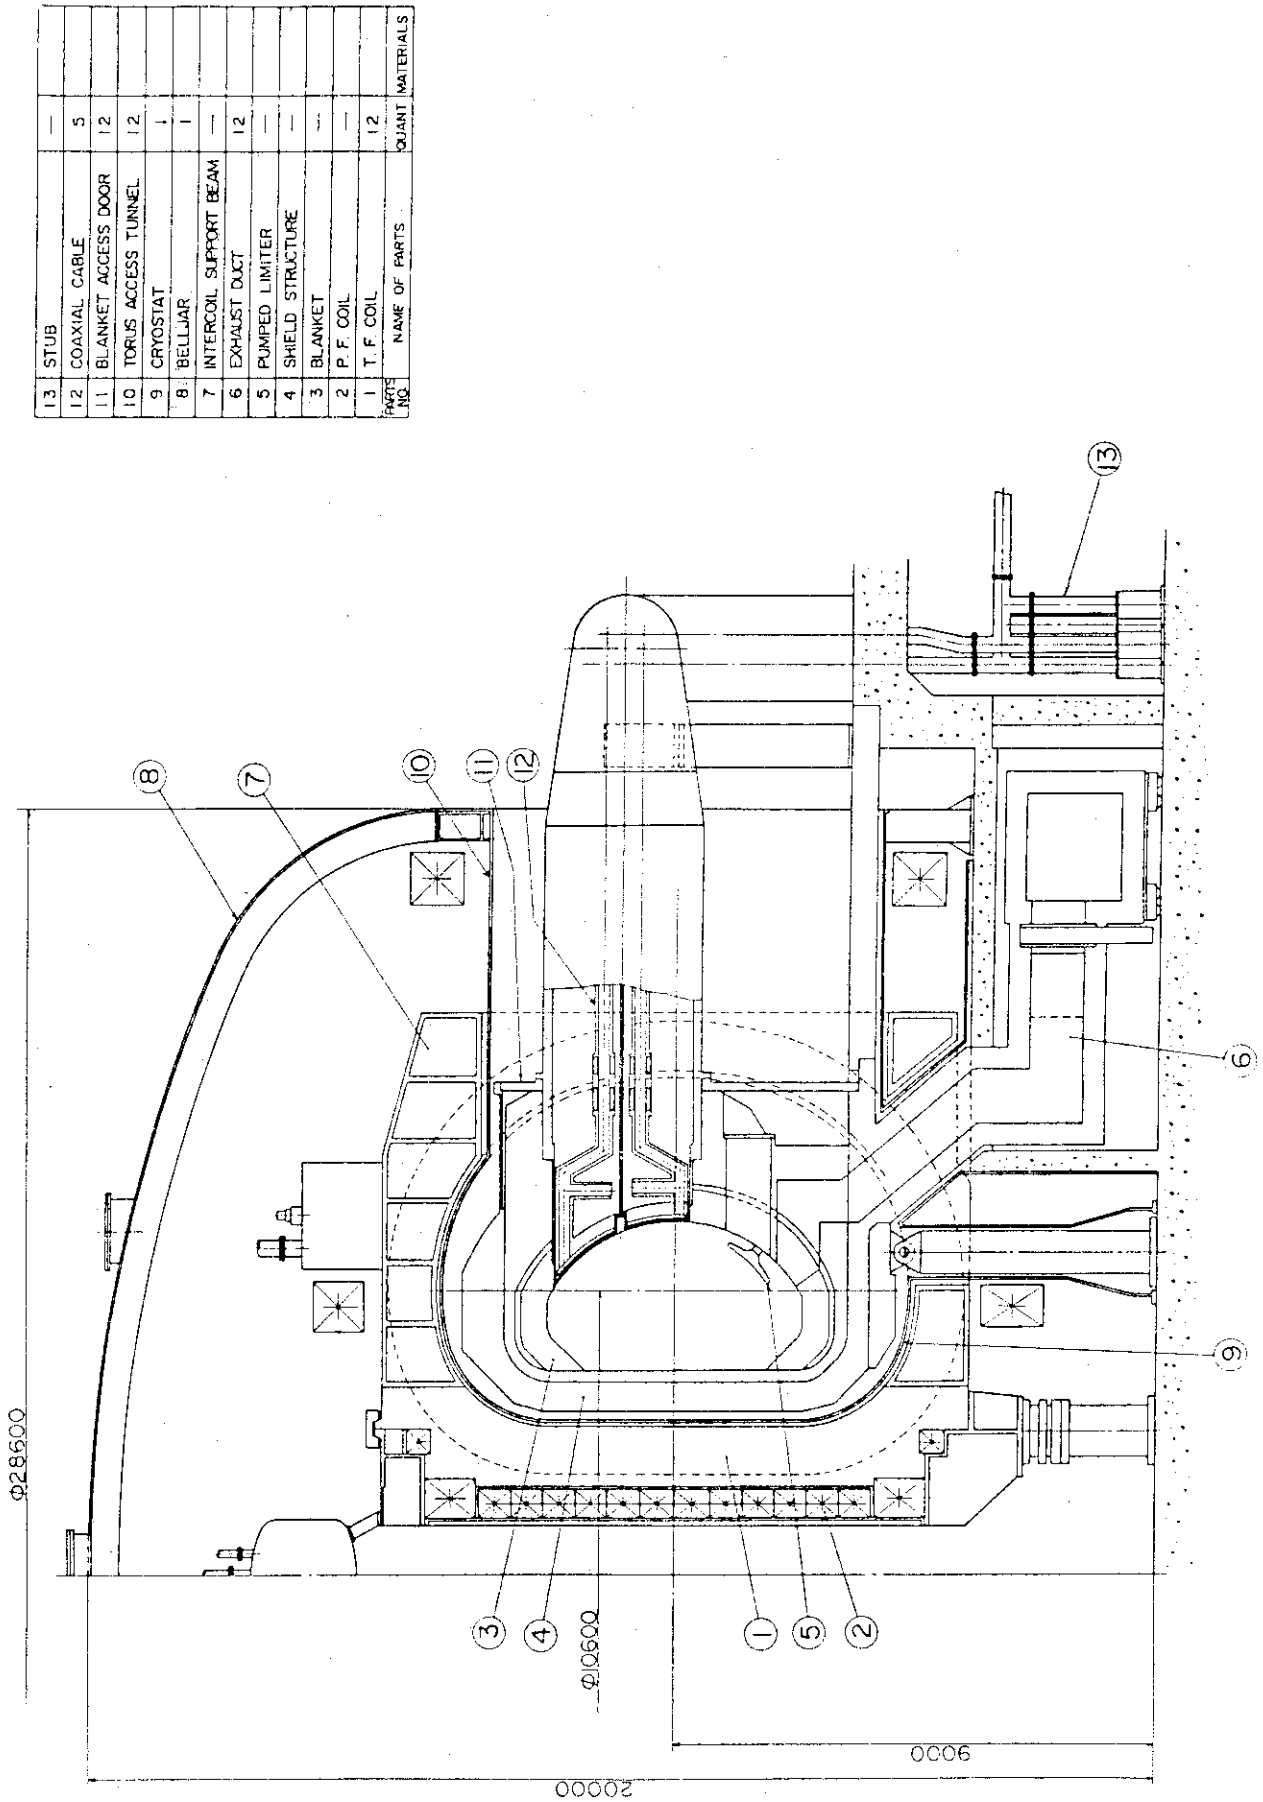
Reactor concept with outboard single pumped limiter
